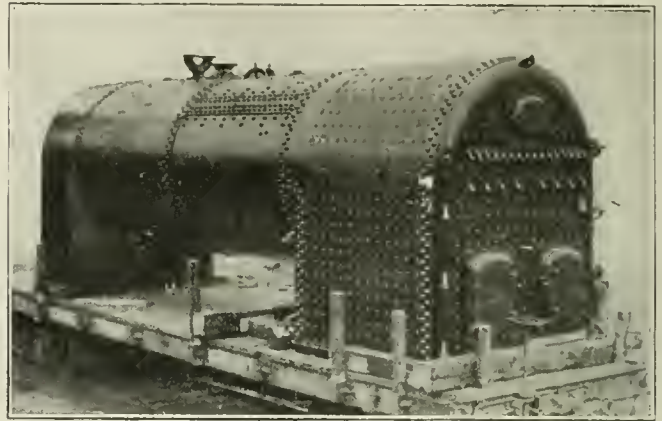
EXTERIOR OF DRY CROWN-SHEET BOILER
